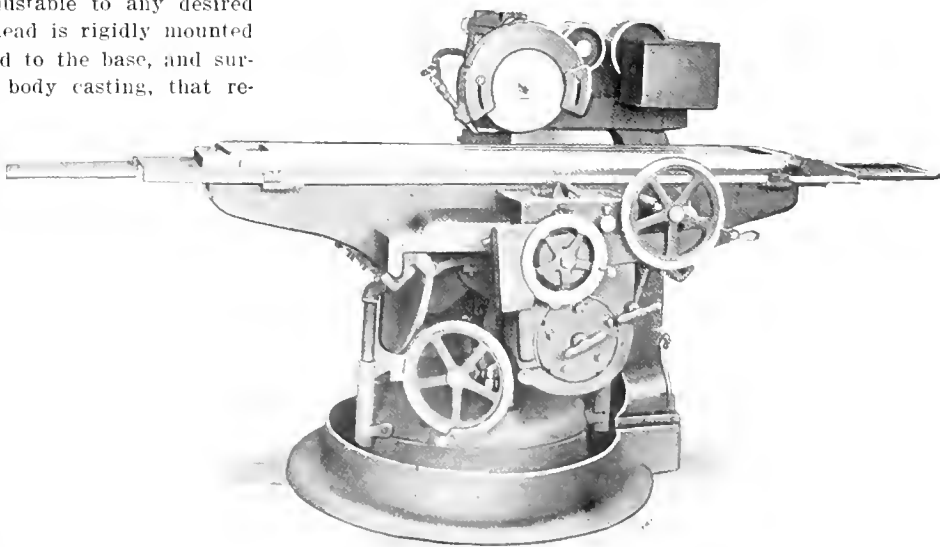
Thompson Grinder Converted into a Surface Grinder
